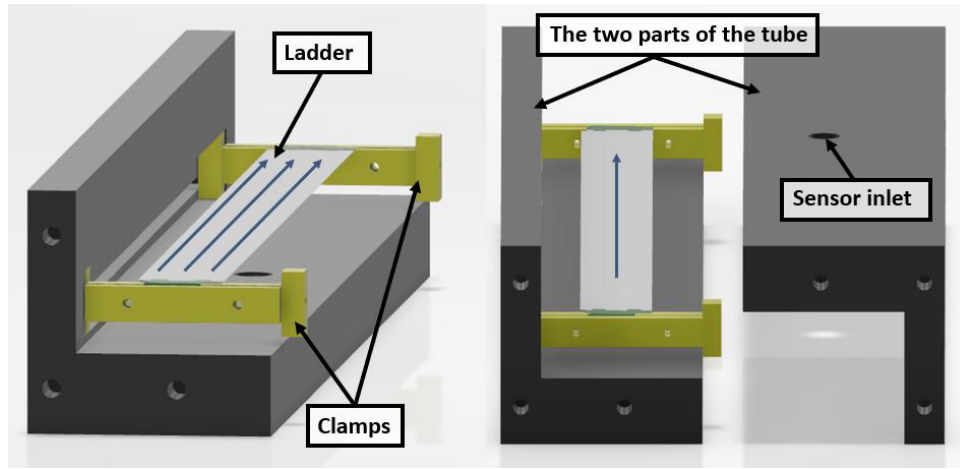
CAD model of the custom-made tube, showing one half of the assembly (left) and both halves separated, which are ultimately screwed together to complete the tube (right). Yellow 3D-printed clamps are used to fix the ladder and reproduce the experimental boundary conditions, blue arrows denote the direction of airflow along the ladder.
